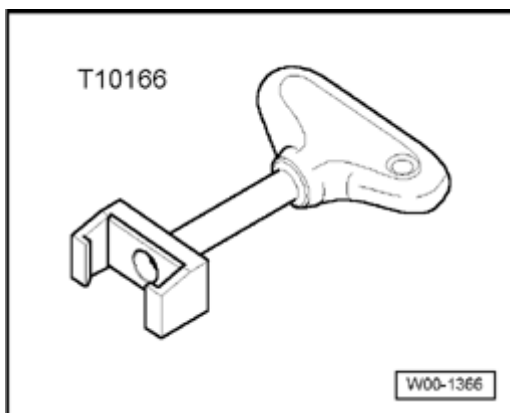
Ignition Coil Puller (W8 W12 Eng.) T10166
